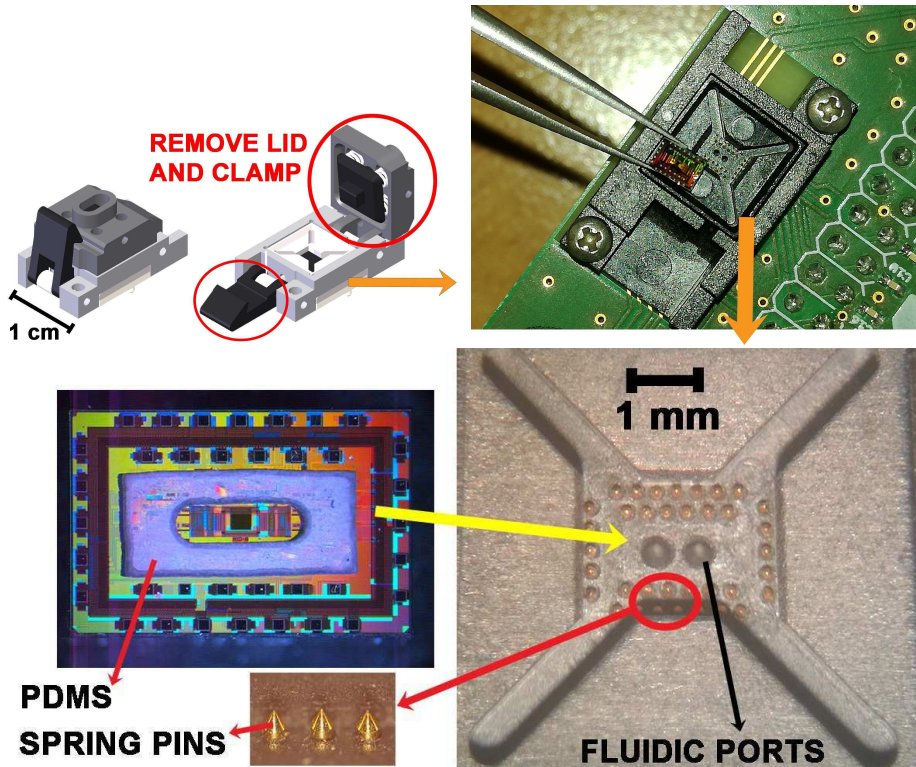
Drawings and photos of the socket and its mounting. Top left: 3D rendering of the socket assembly [254]. The lid and clamp are removed before connecting the socket to the PCB. Top right: photo of the socket mounted on the PCB, together with a chip held with tweezers. Bottom right: detail of the contact spring pins and fluidic ports in the socket. Bottom left: photo of the chip with a PDMS seal ring (the opening, at the center of the seal, is the fluidic chamber that is filled with electrolyte), and optical microscope photo of the spring pins. The chip is inserted upside-down in the socket. Published in [190].
